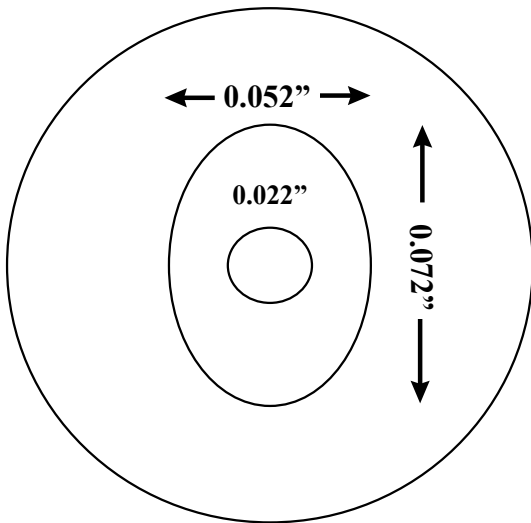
Elliptical Gnd clearance with an 0.022" PTH gives a Cap. of 0.90pF
